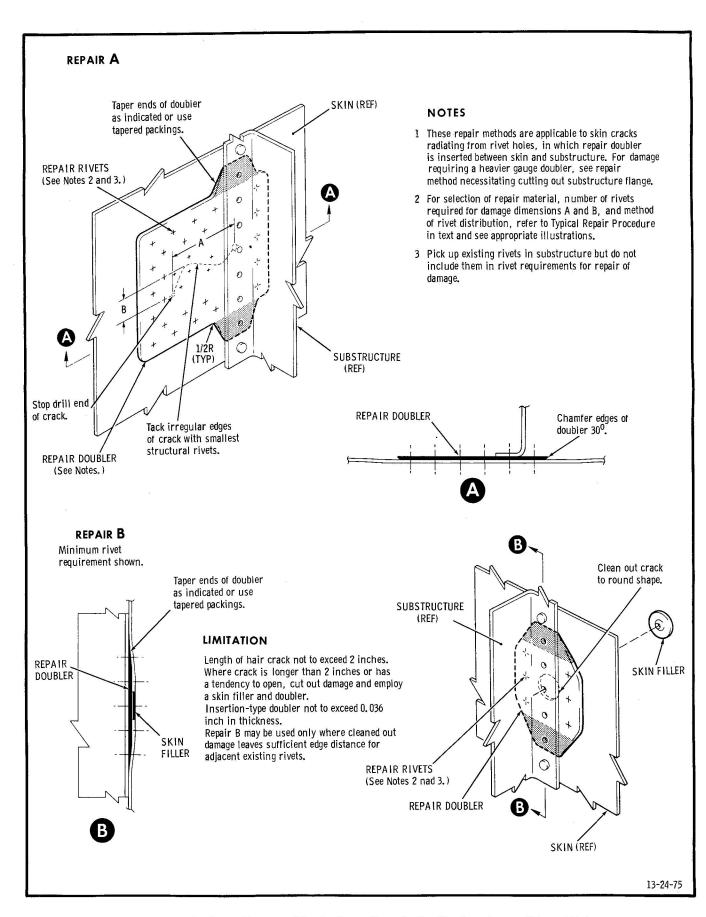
Skin Repair Methods - Crack Radiating from Rivet Hole
